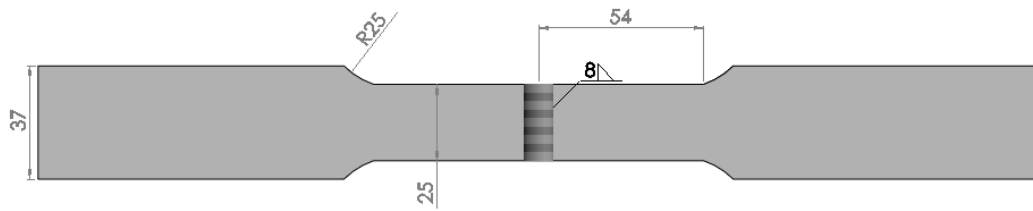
Geometry and dimensions of tensile test samples that were taken from weld seam of two extrusion and sand cast plates
